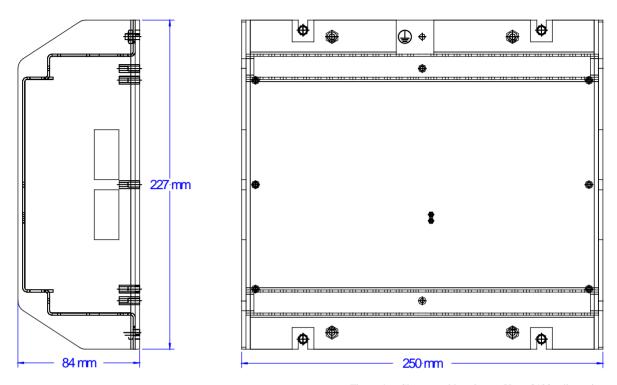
Sheet metal housing easYgen-3100 - dimensions
